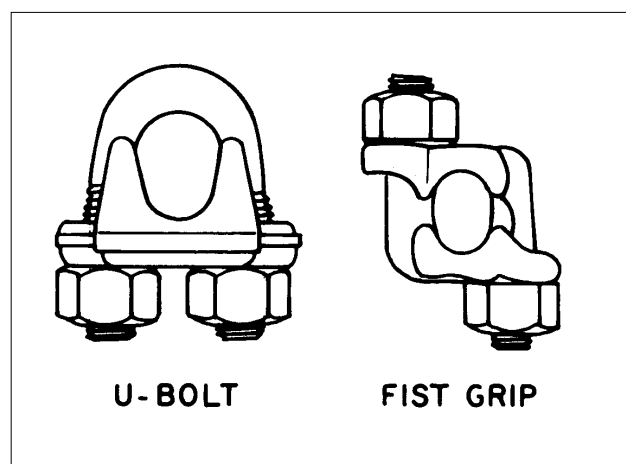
Wire rope clips. Courtesy of the Wire Rope Technical Board.
